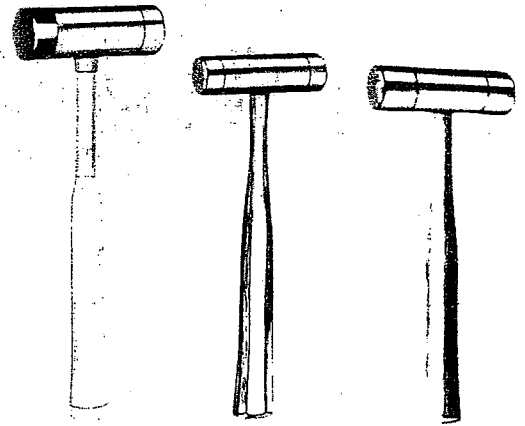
Soft-face hammers protect engine parts. (Snap-On Tools Corporation)
